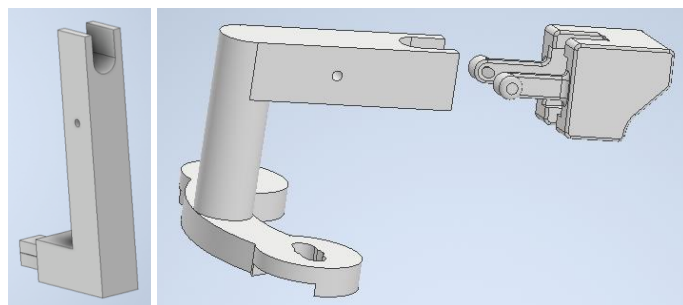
The fixed and rotating support for the hemostasis valve and its closing cap (common for both).
